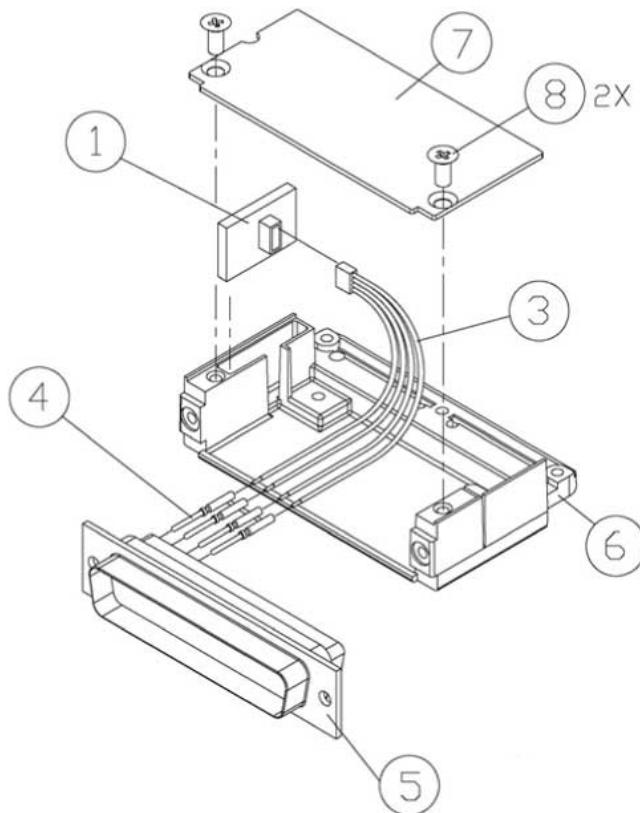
Backshell Assembly (Potted Configuration Module)
